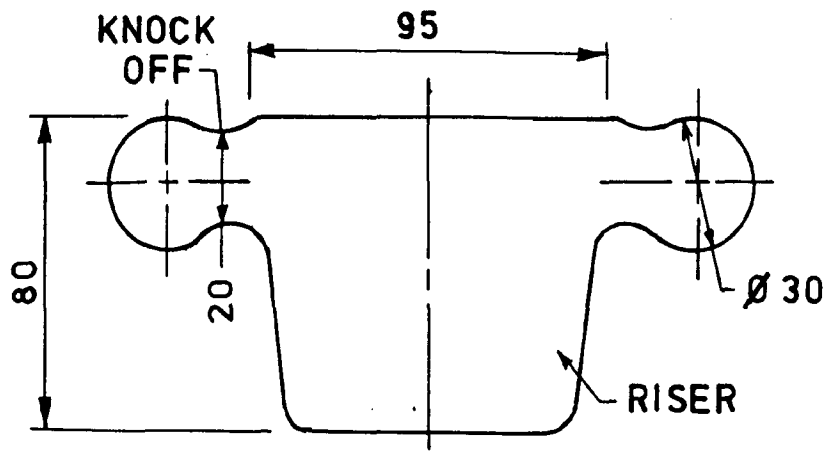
SCHEMATIC ARRANGEMENT FOR POURING TENSILE AND IMPACT TEST SAMPLES.
